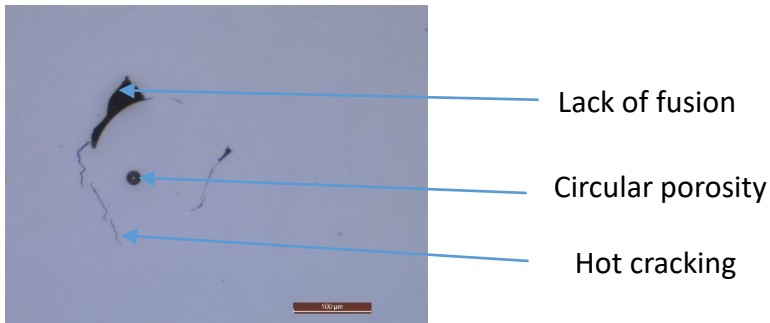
Inc939 printed at 800mm/s piece using ring shape under the microscope (x200)
